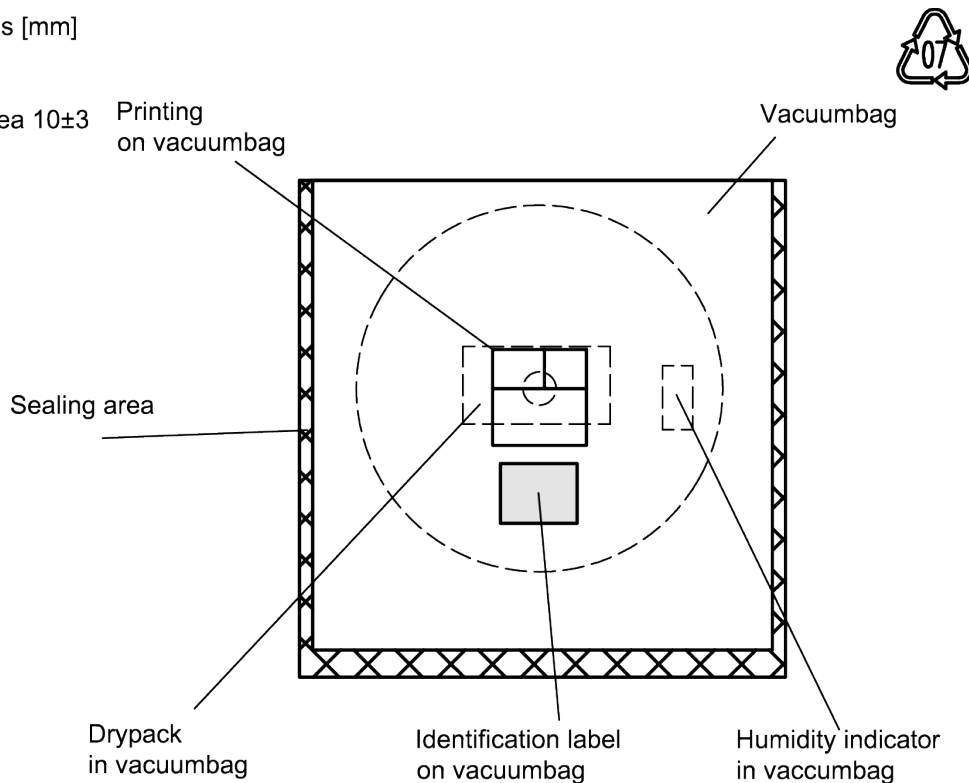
Drawing of moisture barrier bag (MBB) for reel with diameter of 180 mm.
